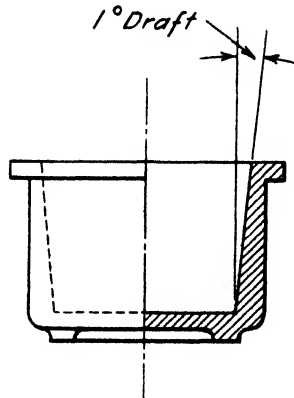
Sketch of a typical molding in which draft is desired on the inside only. When the mold opens, the force is freely drawn out of the molded part, the latter remaining in the cavity until it is ejected by one or more pushout pins working through the bottom of the cavity.
